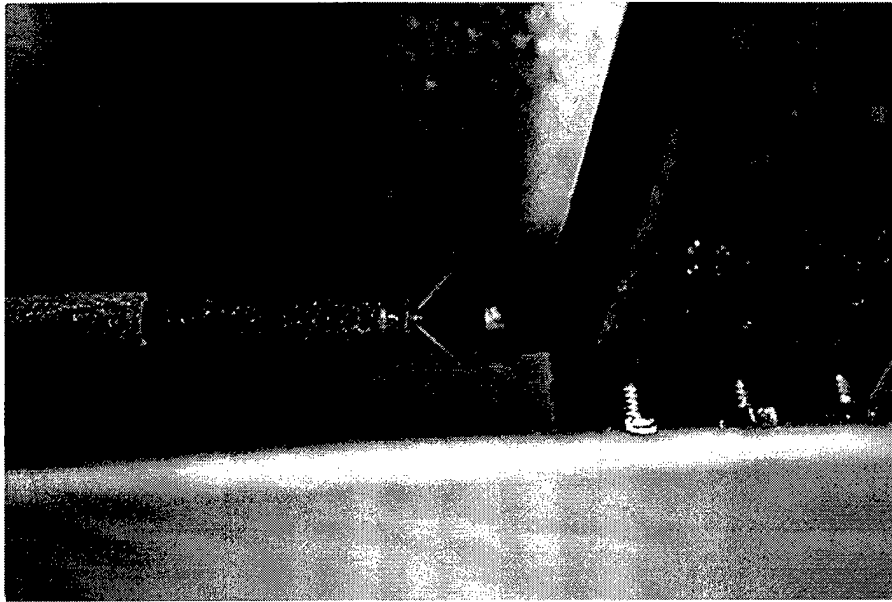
Two-Jet Nozzle Assembly Showing Angled 0.018-Inch Jet Streams
